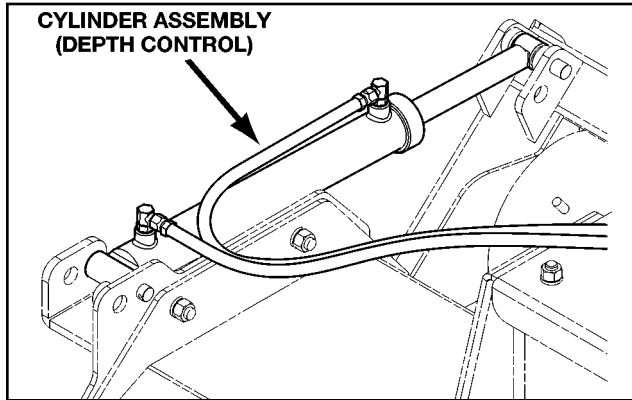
Hydraulic Depth - Cylinder Assembly
